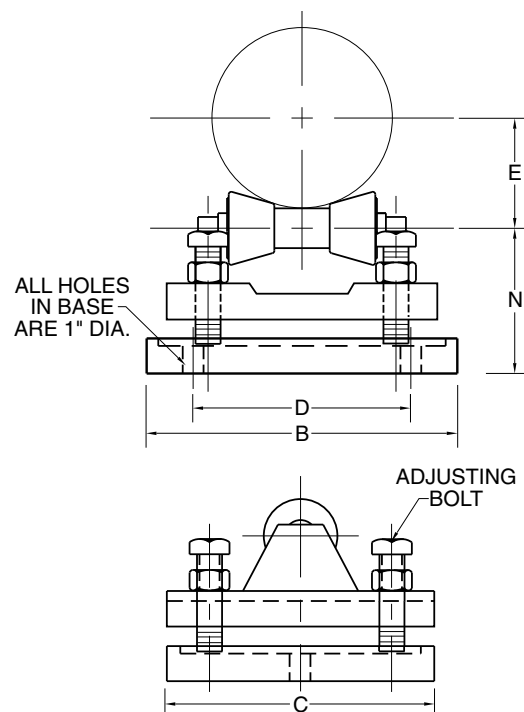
ADJUSTABLE STEEL CHAIR AND ROLL
